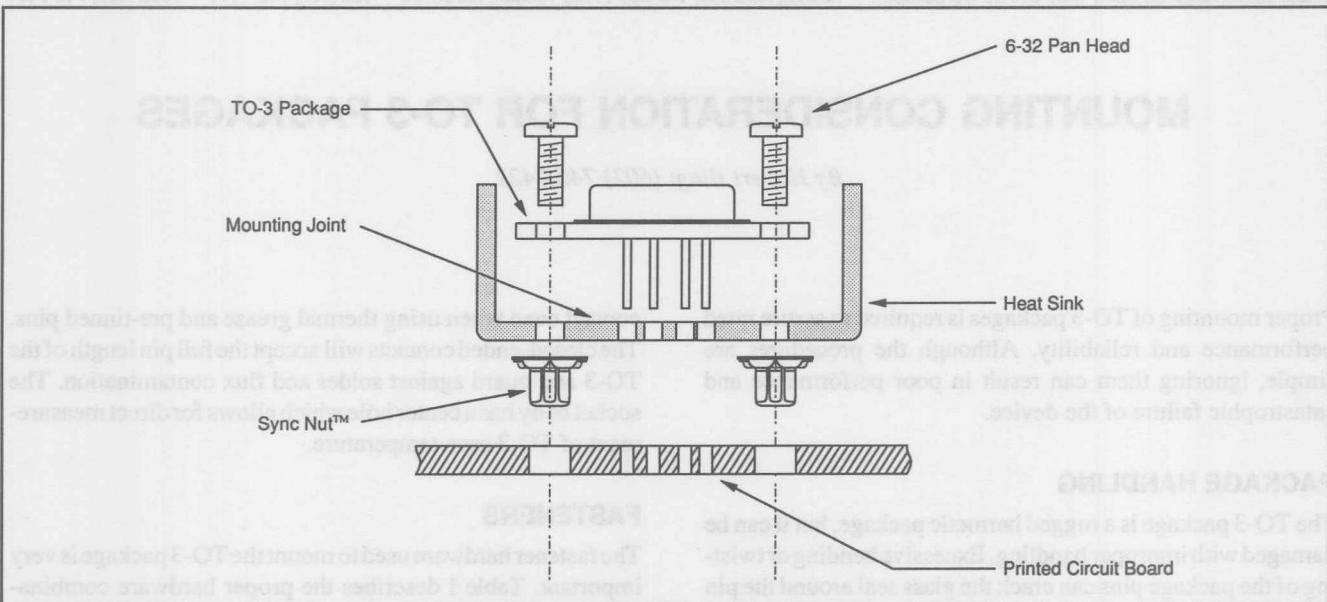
B. Low Power Application Using Printed Circuit Board.
